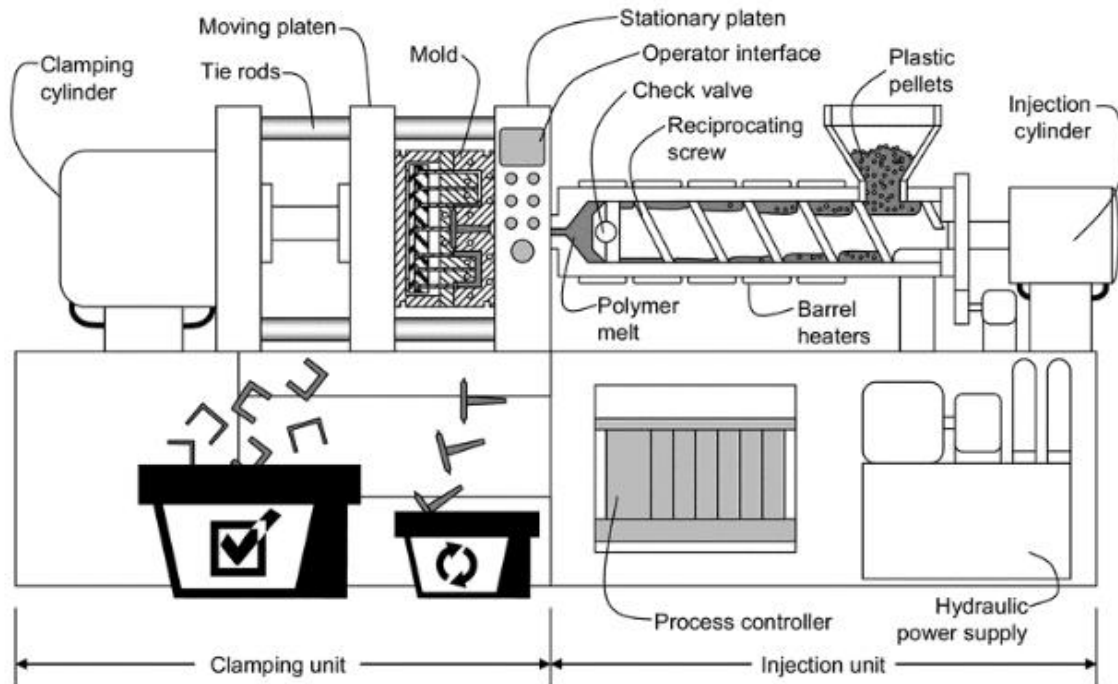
Schematic view of injection molding machine (Kazmer, 2007)
